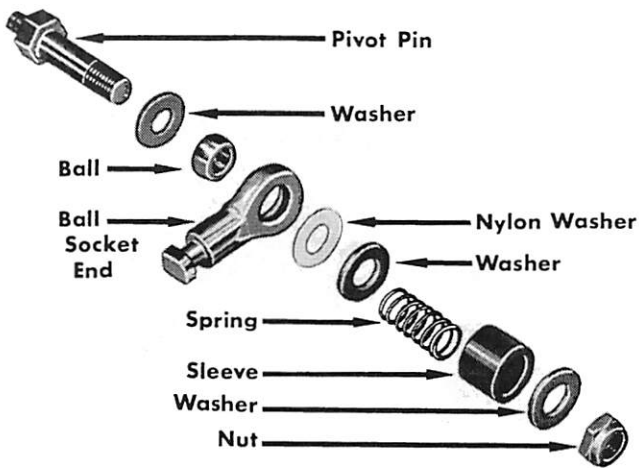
Pivot Pin and Ball Socket Assembly, Single Engine
